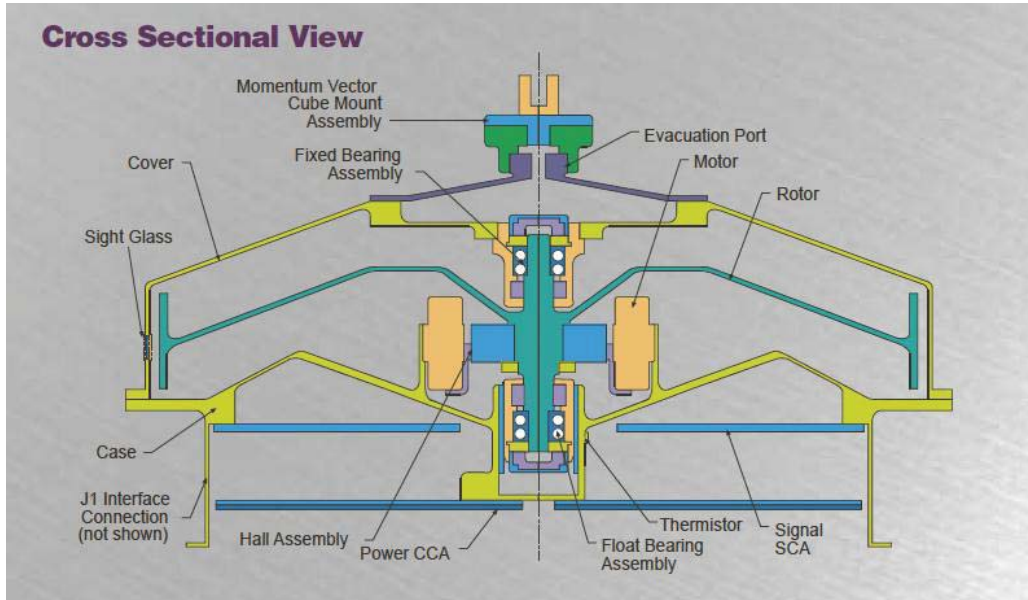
Typical reaction wheel assembly: based upon Honeywell Corporation Model HR 0610 design [10]. 5 kg wheel supported on four R4 ball bearings.
